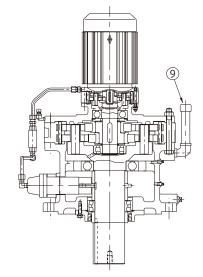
Type CVVM (Vertical, Gearmotor), 2 Stage Reduction (Example: Frame size 6225DA)
